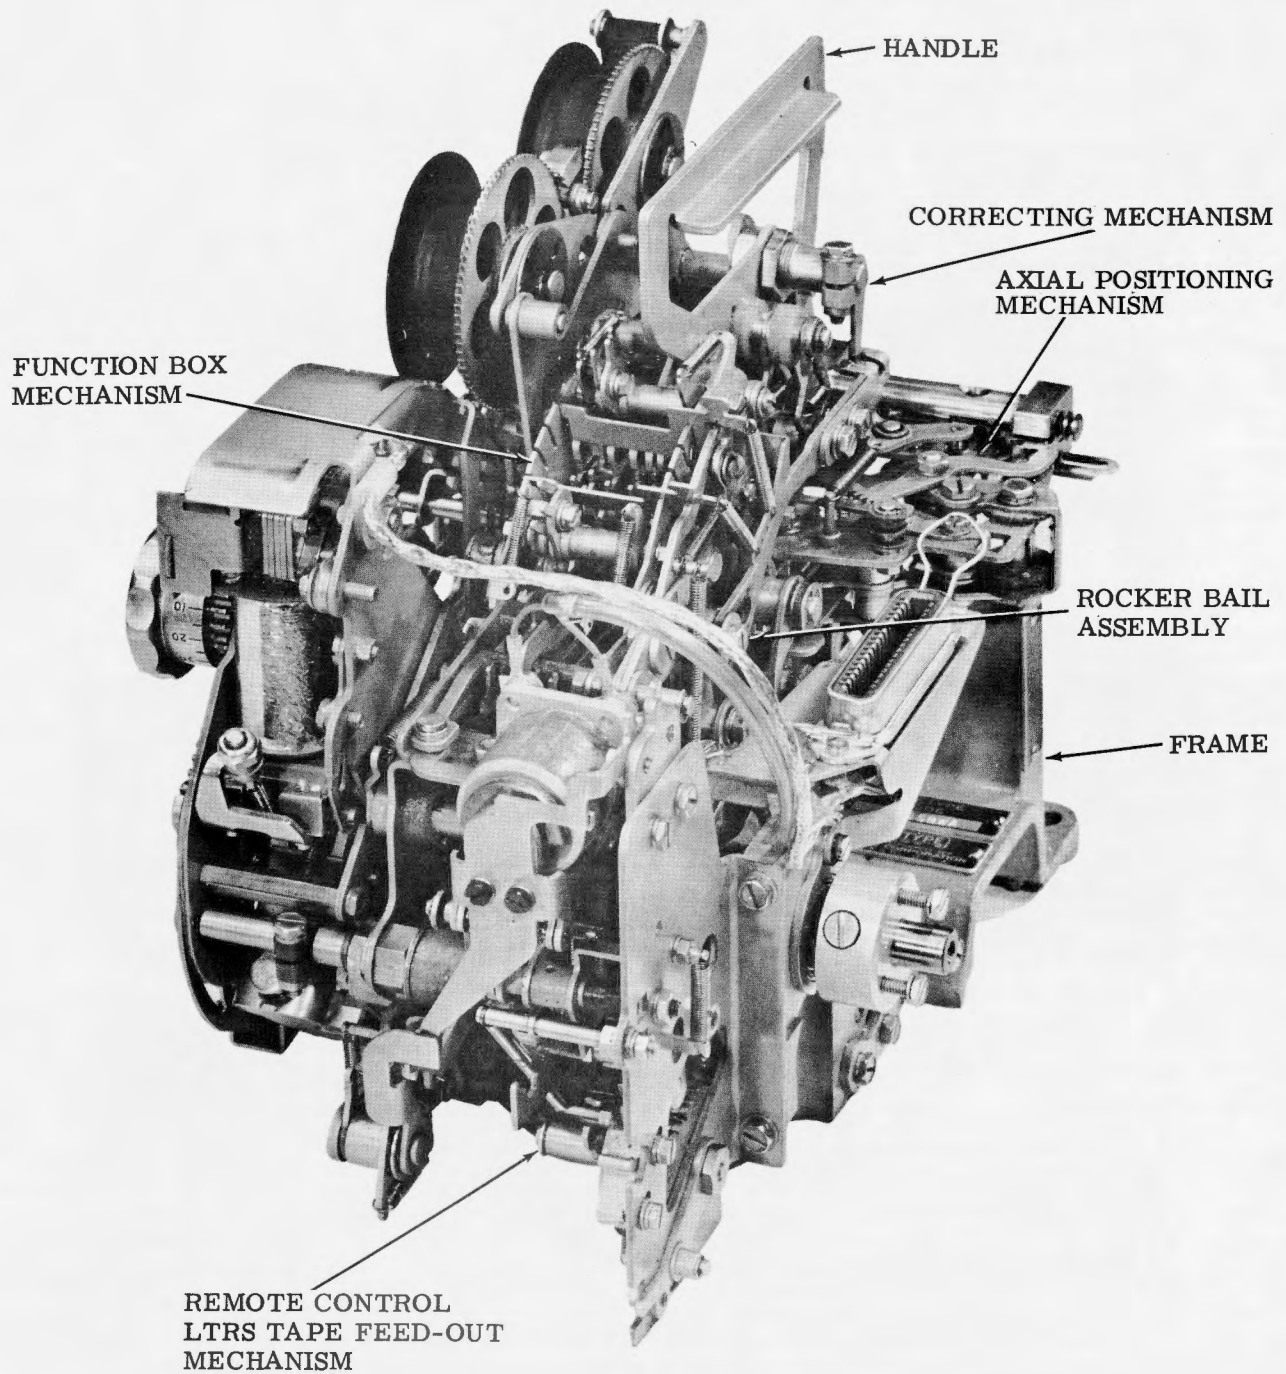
28 Typing Reperforator Unit With Remote Control LTRS Tape Feed-Out Mechanism (Rear View)
